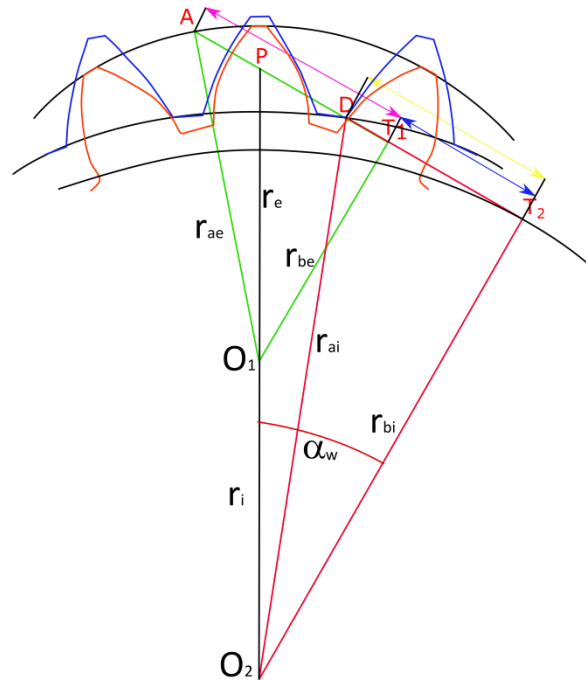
Geometrical description of path of contact AD for internal gears.
